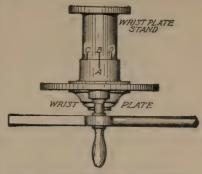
Corliss Wrist Plate for Adjusting Carrier Rod
